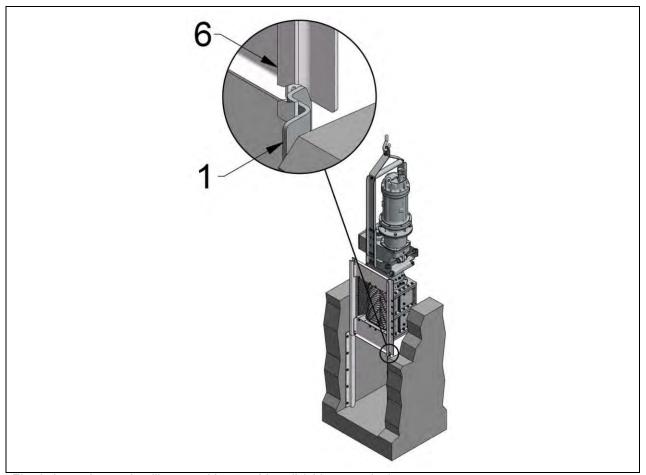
Lowering and pulling up without guide rail (side mounting)
